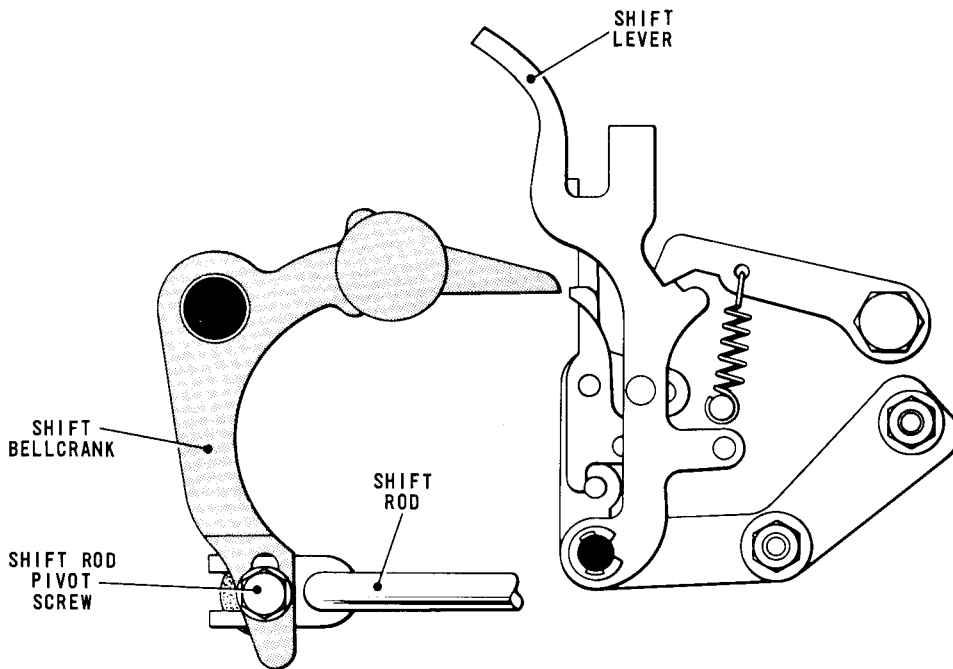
SHIFT ROD/SHIFT BELLCRANK LINKAGE—REAR VIEW
